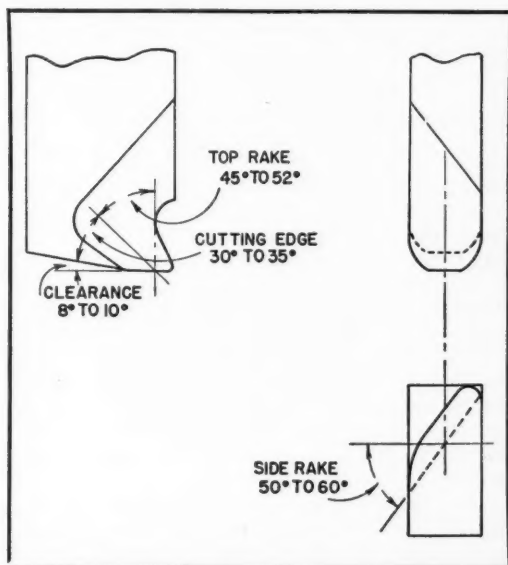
Drawing Showing Suggested Grinding Angles for Planer or Shaper Roughing Tools
